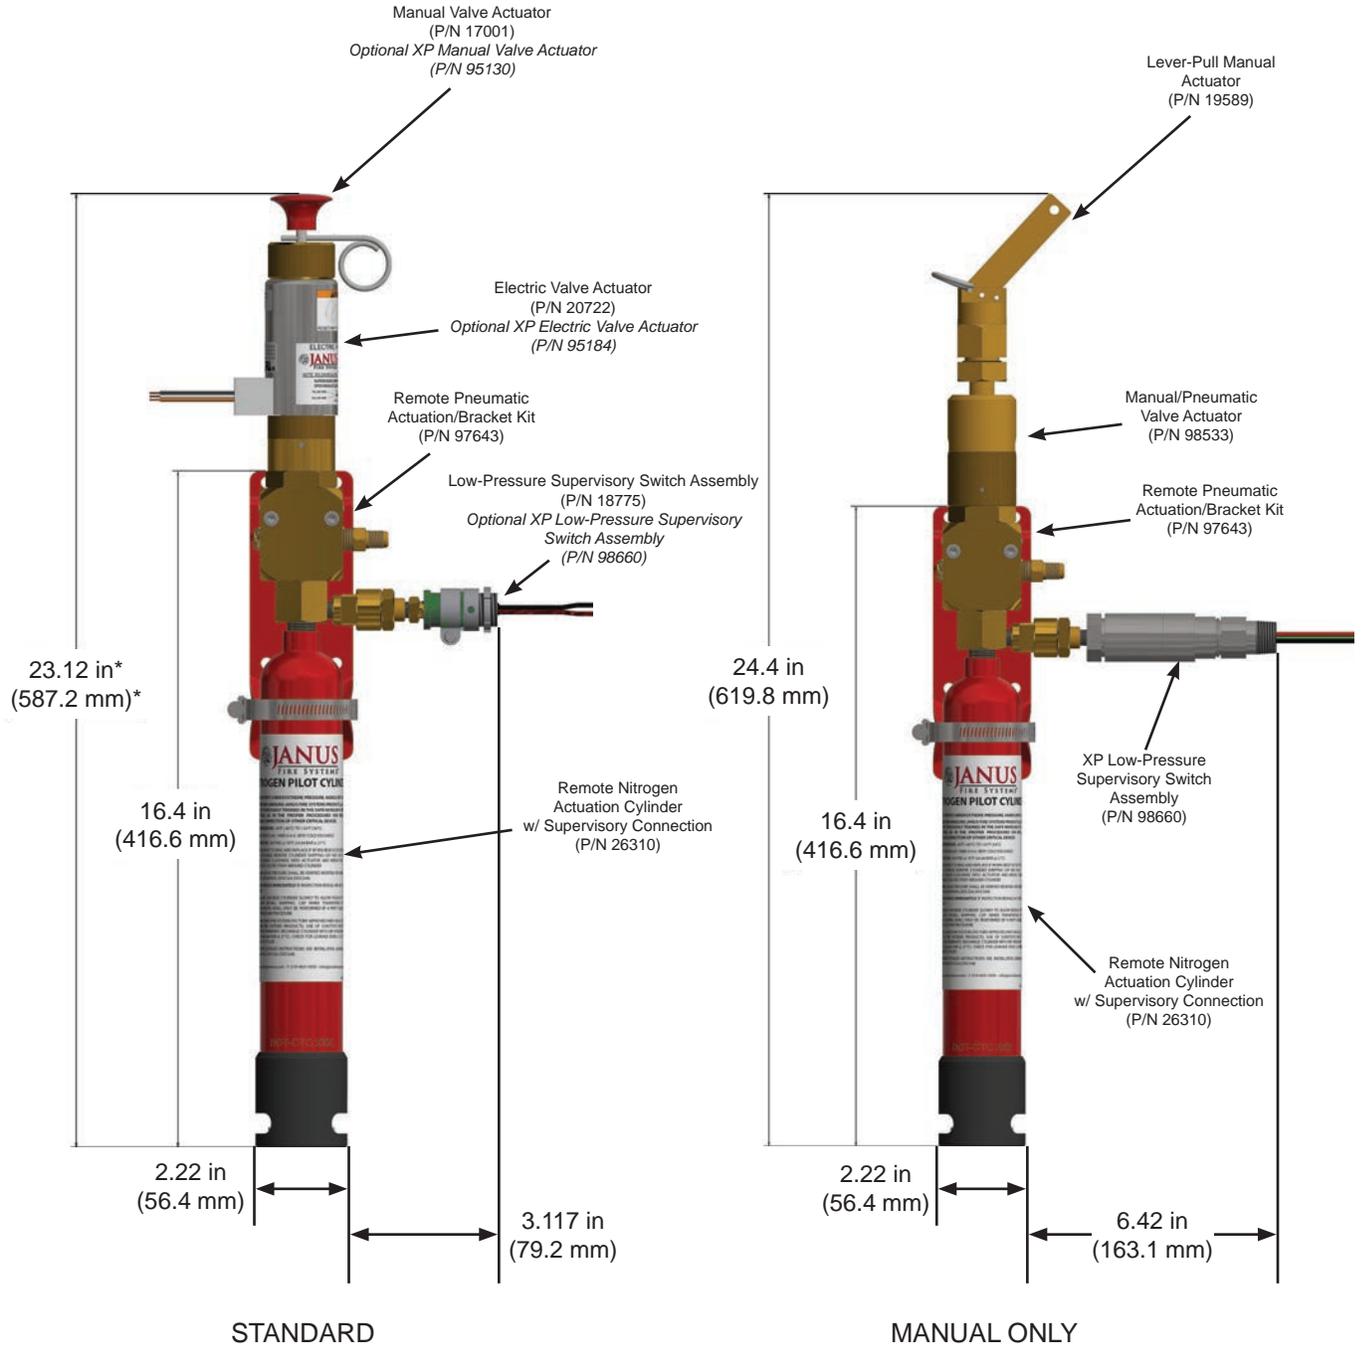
Remote Actuation Cylinder w Supervisory Connection Dimensions
